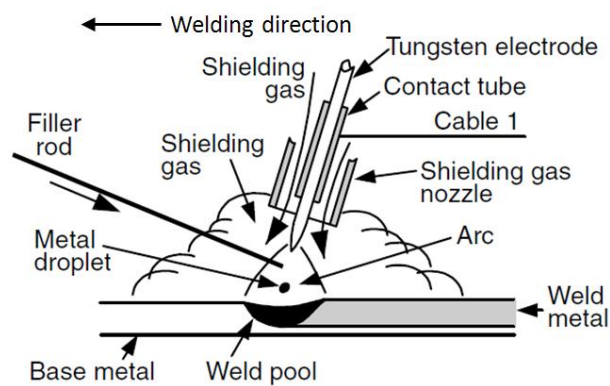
Schematic illustration of welding area in Gas Tungsten Arc Welding [Kou02]
